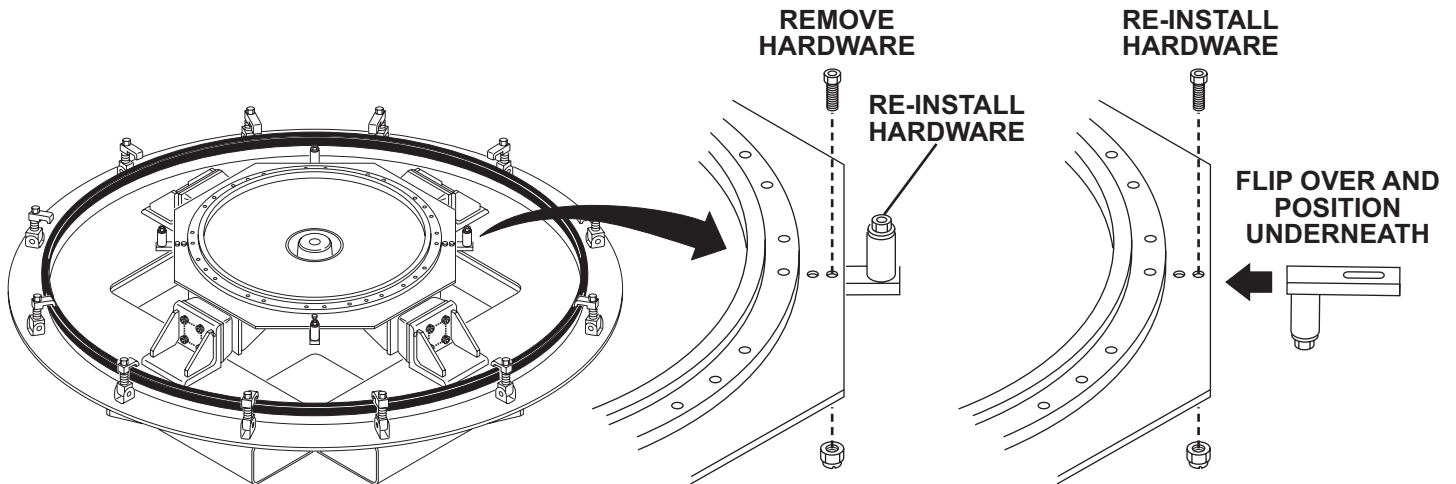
Adapter Storage Brackets (Storage Position).
